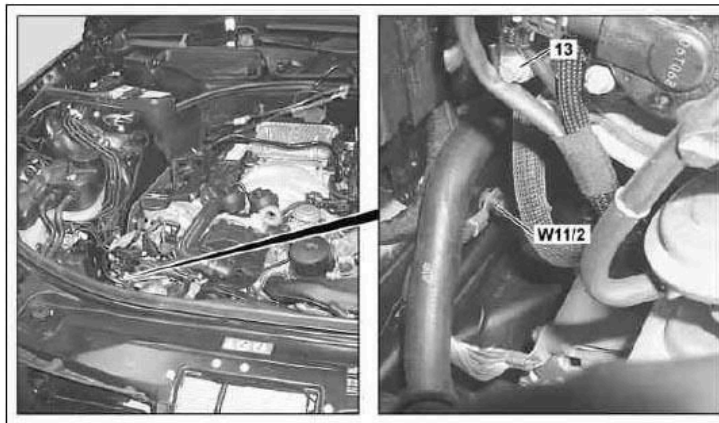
Identifying Engine Wiring Harness Related Components (Shown On Model 221.171 With Code 487)
